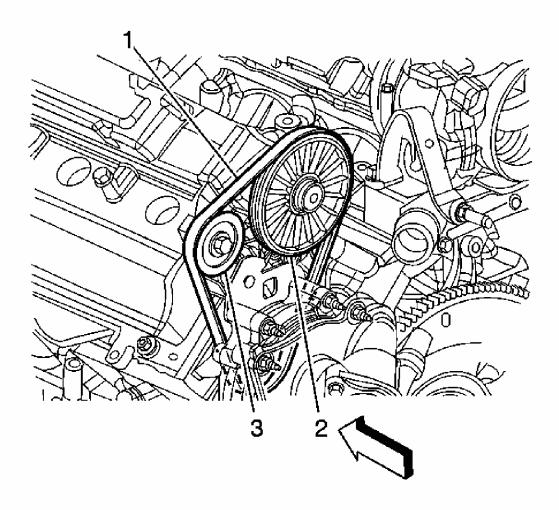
Removing/Installing Water Pump Drive Belt Courtesy of GENERAL MOTORS CORP.
